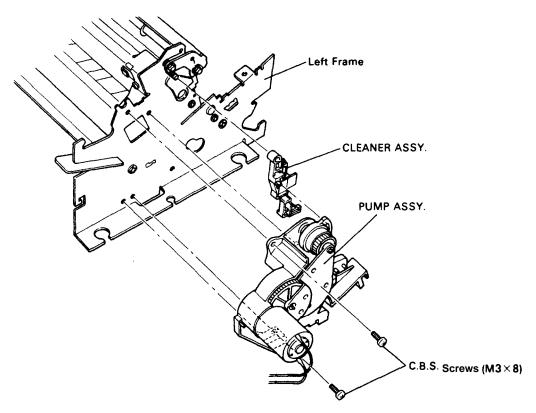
Disassembly of PUMP ASSY. and CLEANER ASSY.
